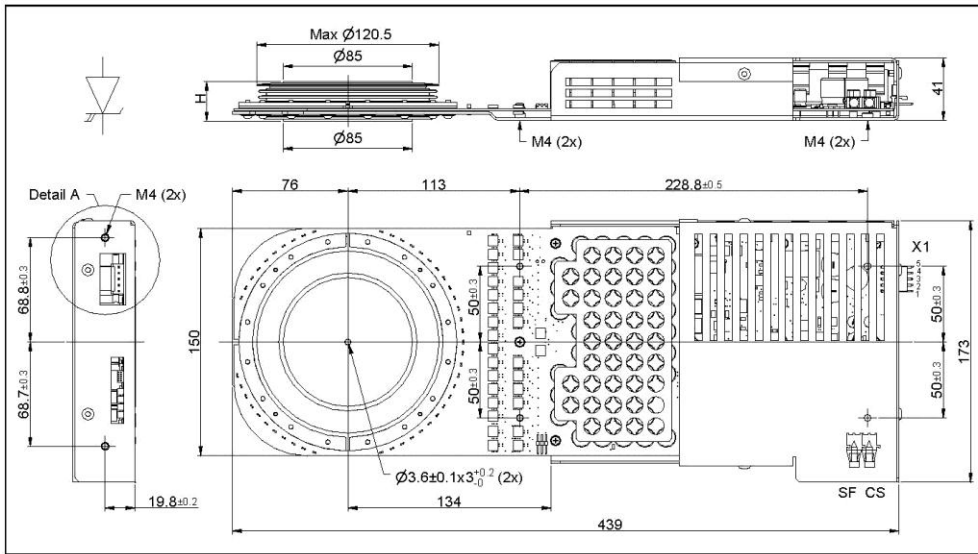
Outline drawing; all dimensions are in millimeters and represent nominal values unless stated otherwise
